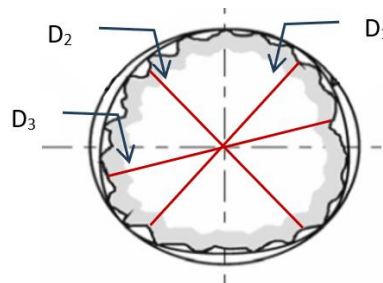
Circularity Defect on a Cylindrical Test Specimen (Variable diameter along the specimen:  $D_1 \neq D_2 \neq D_3$ ).
